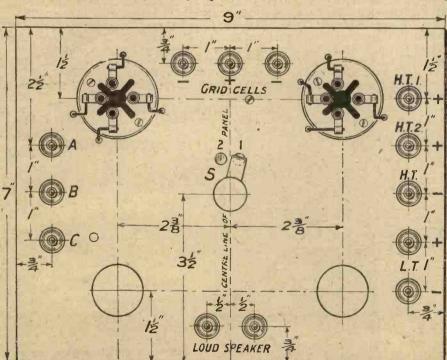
This drawing, which is exactly half size, shows the positions of the parts. Full size Blueprint No. C1010A may be obtained.
